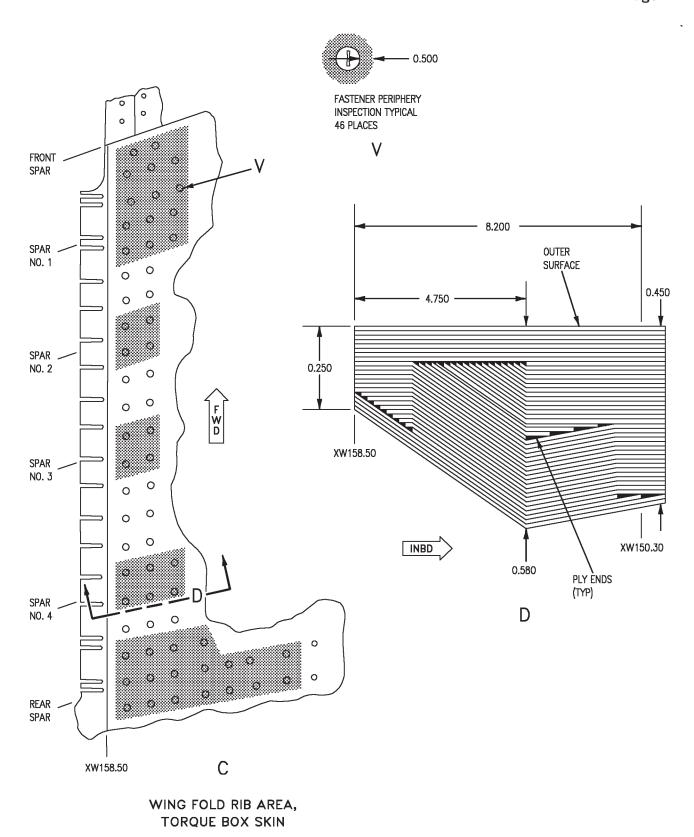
Inner Wing Upper Surface Solid Composite Laminate and Door Sill Inspection Areas (Sheet 3)
